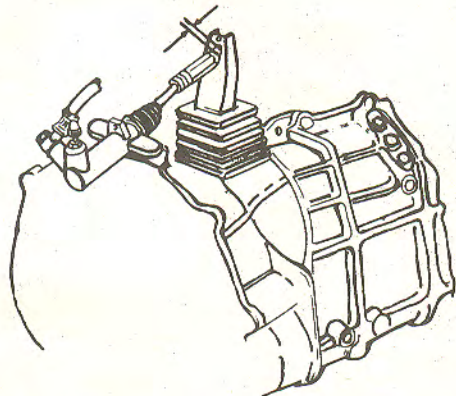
Adjusting the free play on the clutch release fork. The dimension shown by the arrow should be 3.0 mm (0.12 in.).
